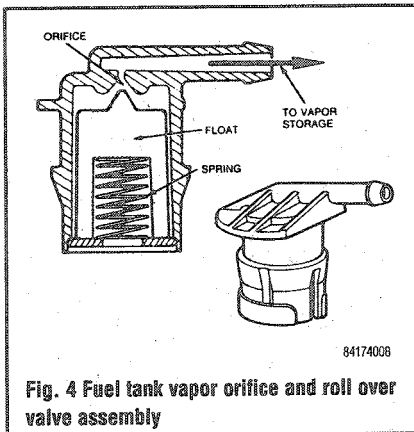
Fuel tank vapor orifice and roll over valve assembly
